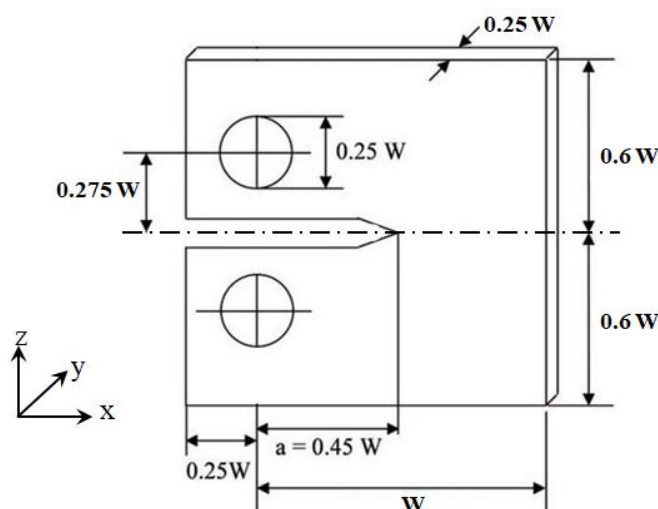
Dimensions of CT specimen to ASTM D5045 [8].
